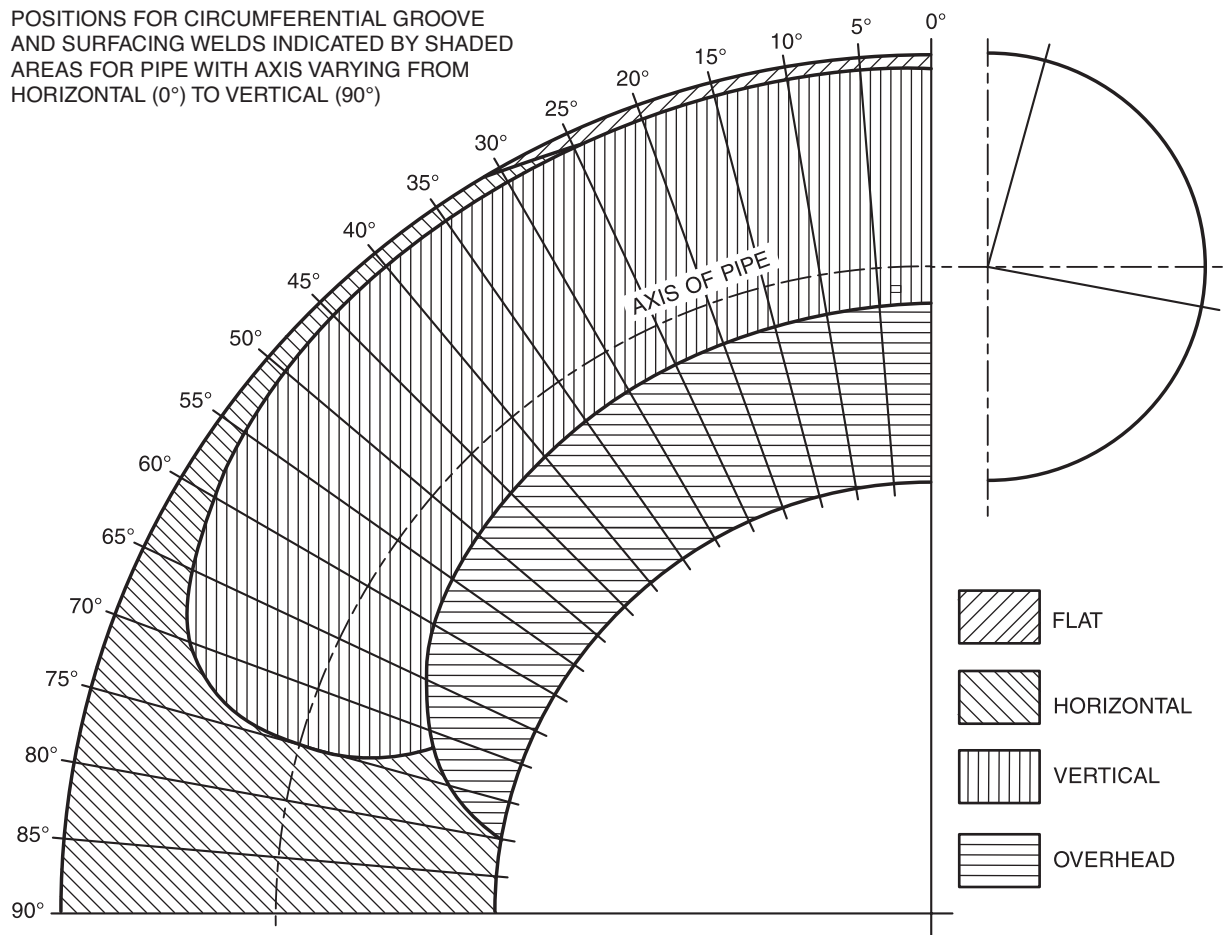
C—Welding Position Diagram for Groove Welds and Surfacing Welds in Pipe
